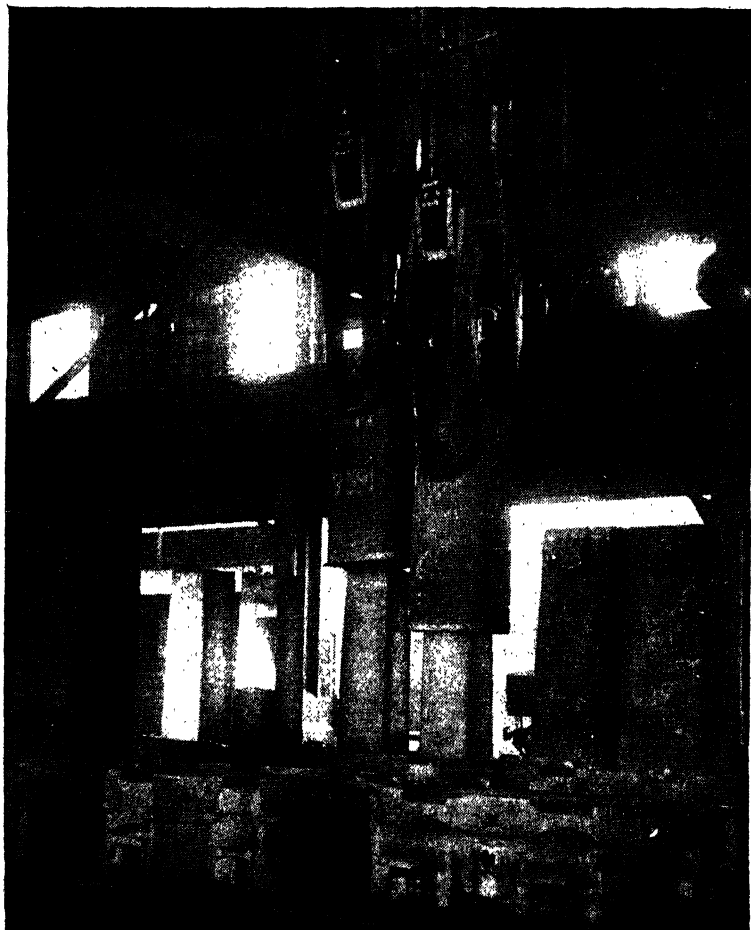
II.—Stripping the mold from an ingot. (*Courtesy of the Youngstown Sheet and Tube Company.*)
